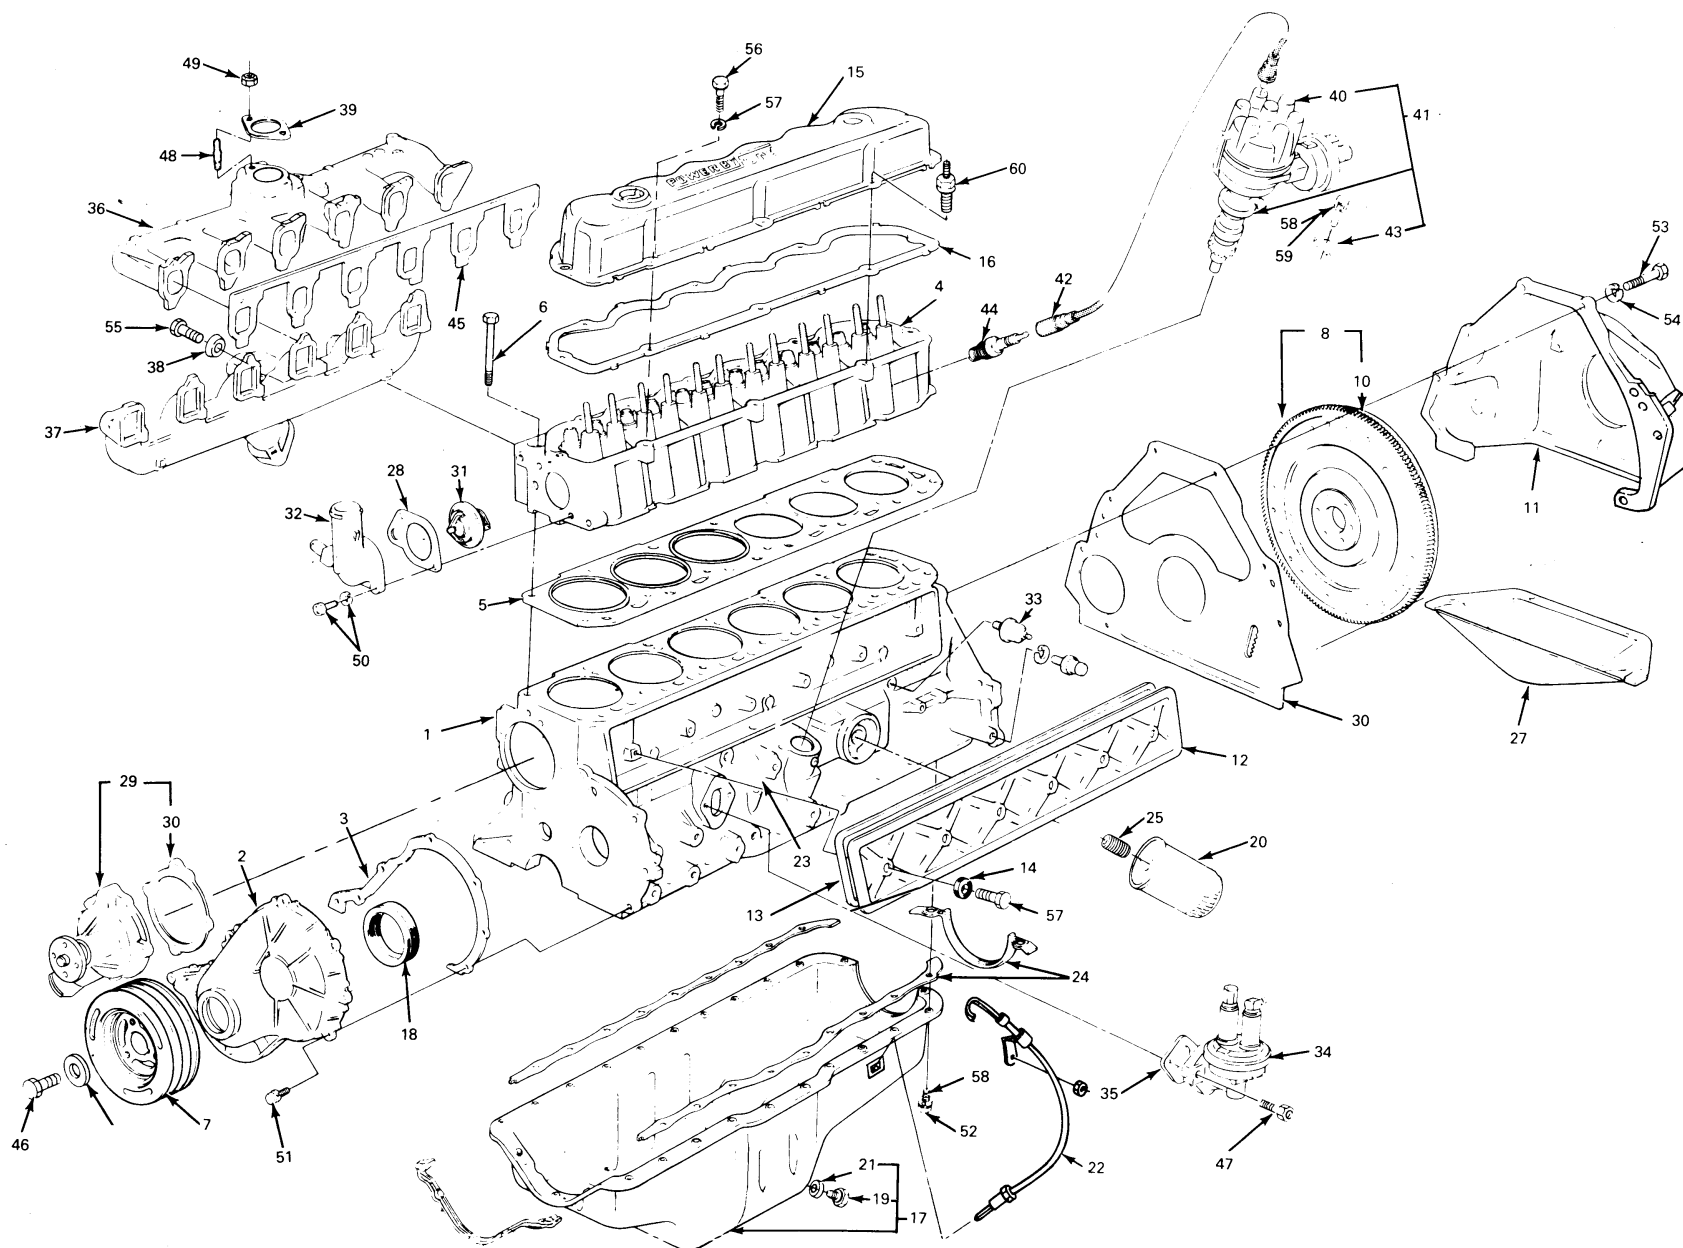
External Exploded View—4.9L (300 CID) I-6 Engine
